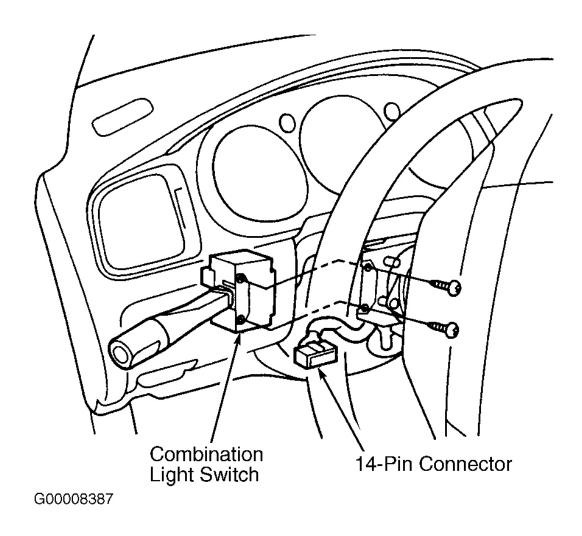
Removing/Installing Turn Signal/Headlight Switch Courtesy of AMERICAN HONDA MOTOR CO., INC.
